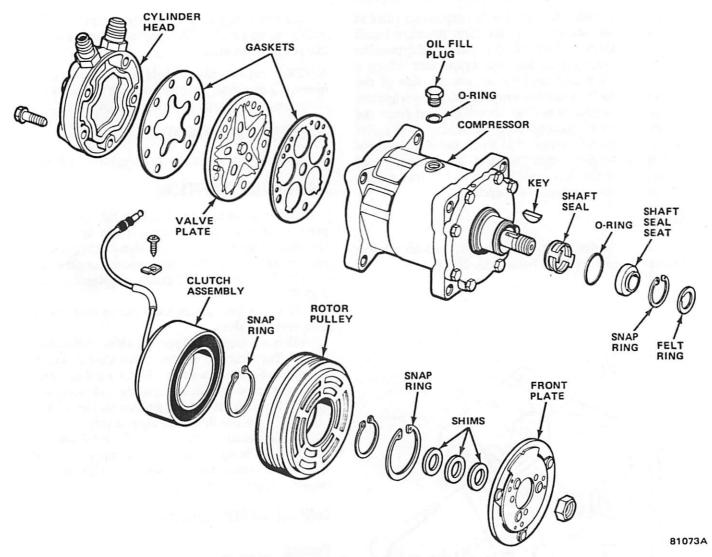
E-19 Compressor Components—Six-Cylinder Engine
